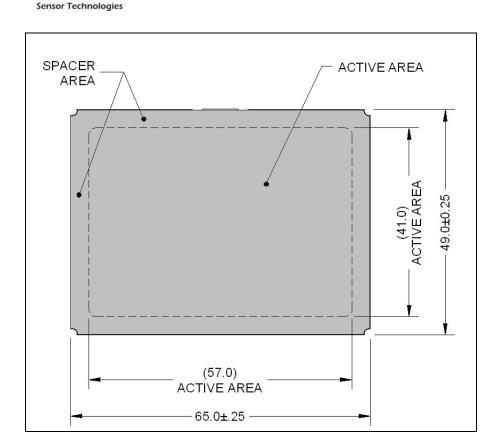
Top View of VersaPad sensor showing hidden spacer geometry. Dimensions are in mm.
